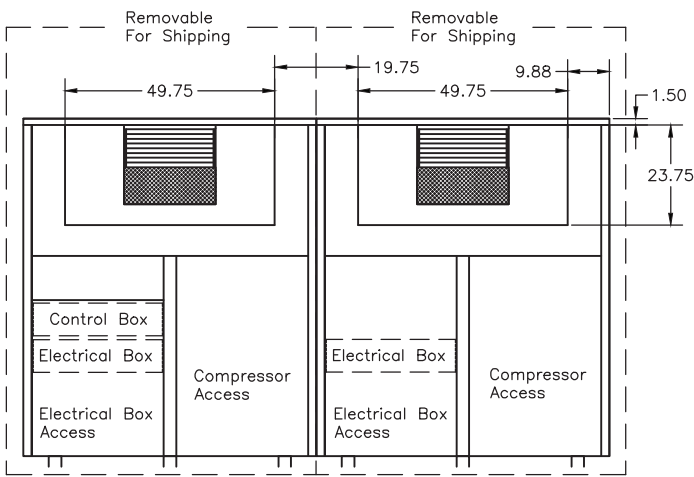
50BVT,V,W044-064 (High-Boy) Dimensions
